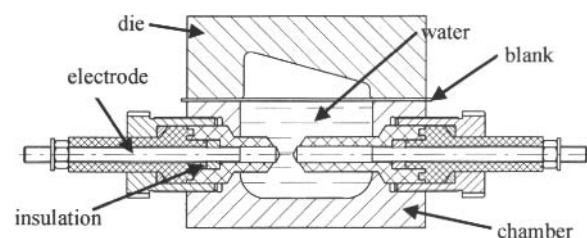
Design of the electrohydraulic forming tool: side cross-section of the chamber.
